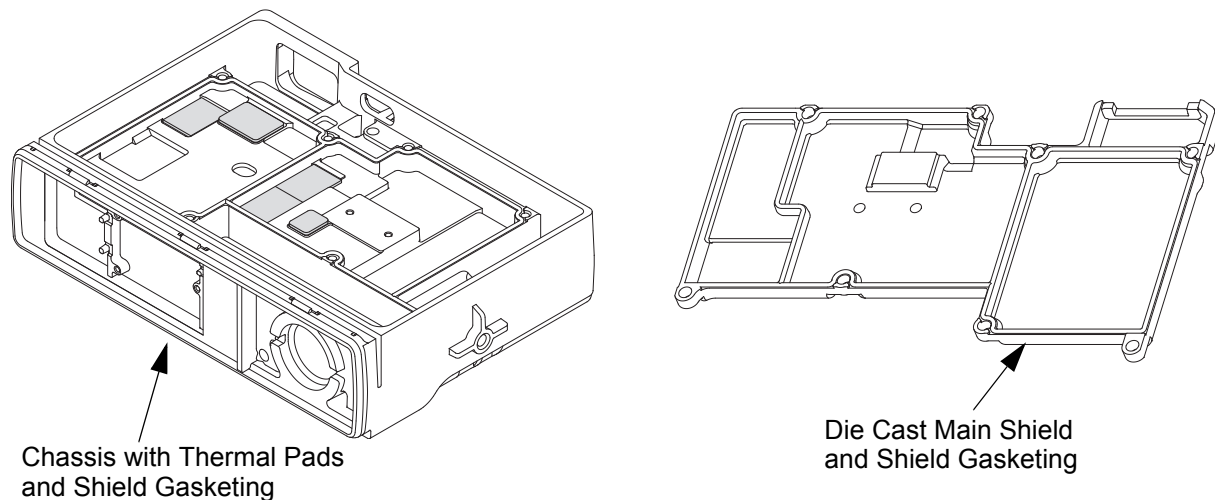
Thermal Pads and Shield Gasketing on Chassis and Die Cast Main Shield
